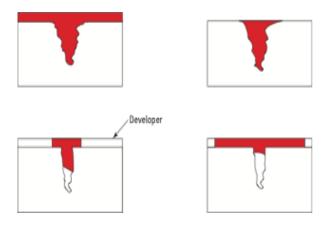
Liquid (Dye) Penetrant Method
